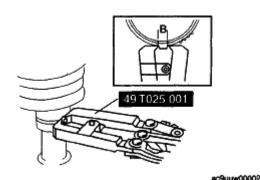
Crimping Wheel Side Small Boot Band Courtesy of MAZDA MOTORS CORP.
